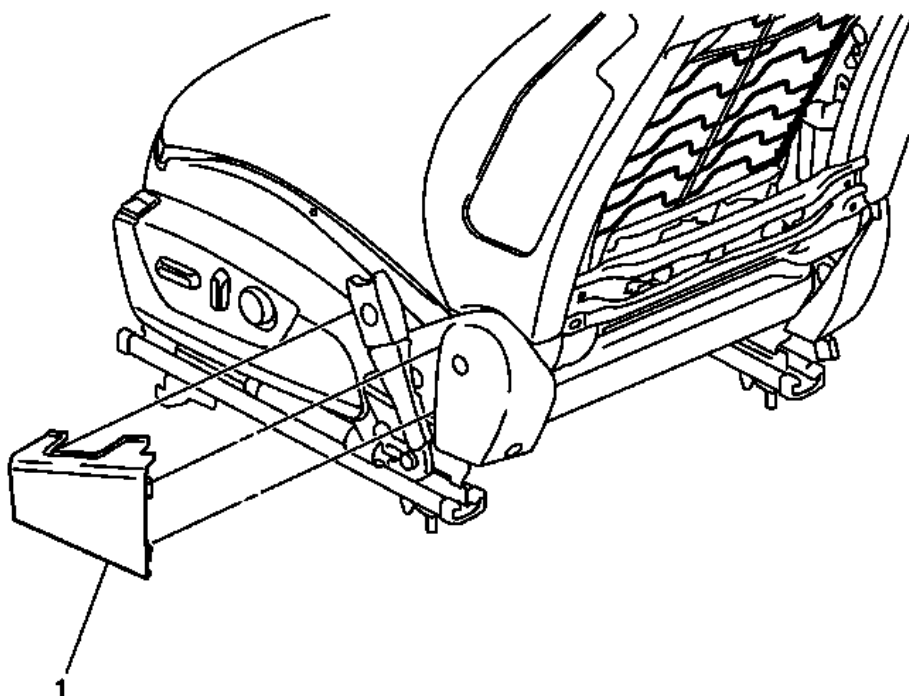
Driver Or Passenger Seat Outer Adjuster Finish Cover (8-Way Power)
